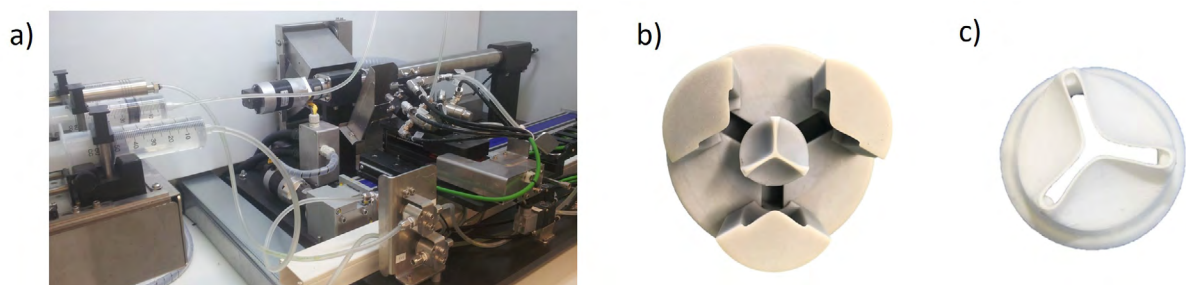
Spray machine (a); custom mould/modular outer mould system (b) and final valve (c).
